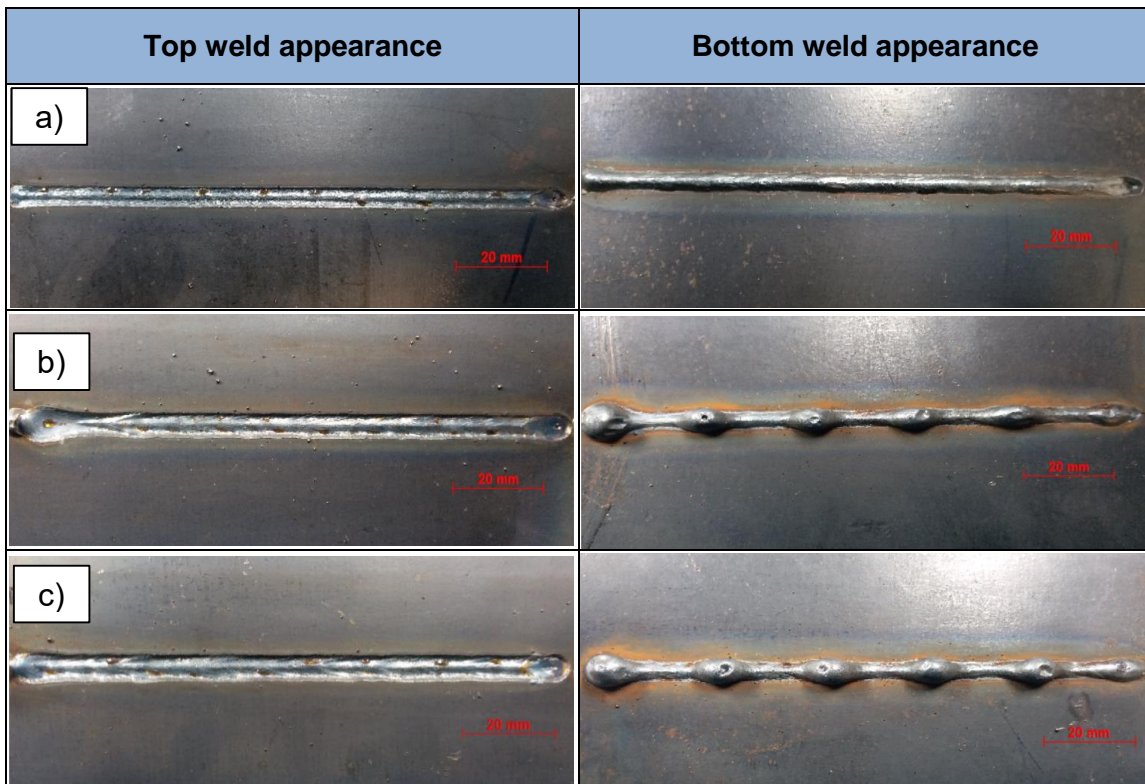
Top and bottom weld appearances of the specimen welded at constant $P_L = 6400$ W, $TS = 1$ m/min and different wire feed speeds a) $WFS = 2$ m/min b) $WFS = 4$ m/min c) $WFS = 6$ m/min, Mode = CMT, Thickness = 8 mm
